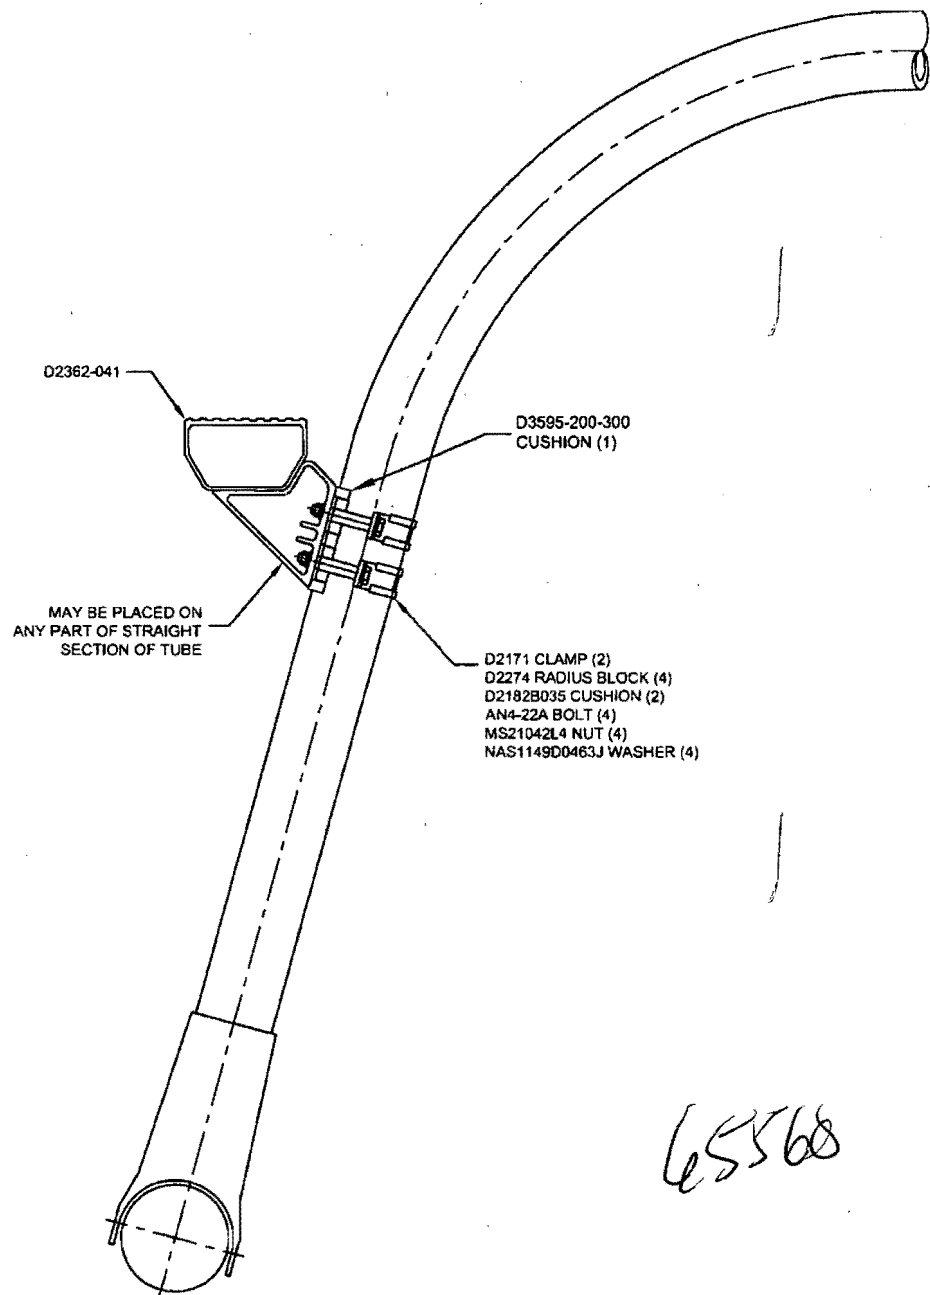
D350-591-117A Heli-Access-Step™, Pre-Flight Step
